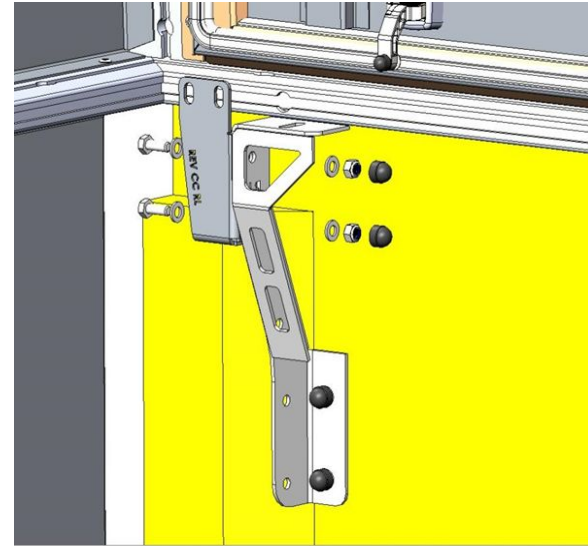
Top Rear Mount Bracket positioned with M8x20 hex head bolts, washers, nyloc nuts and nut caps.
